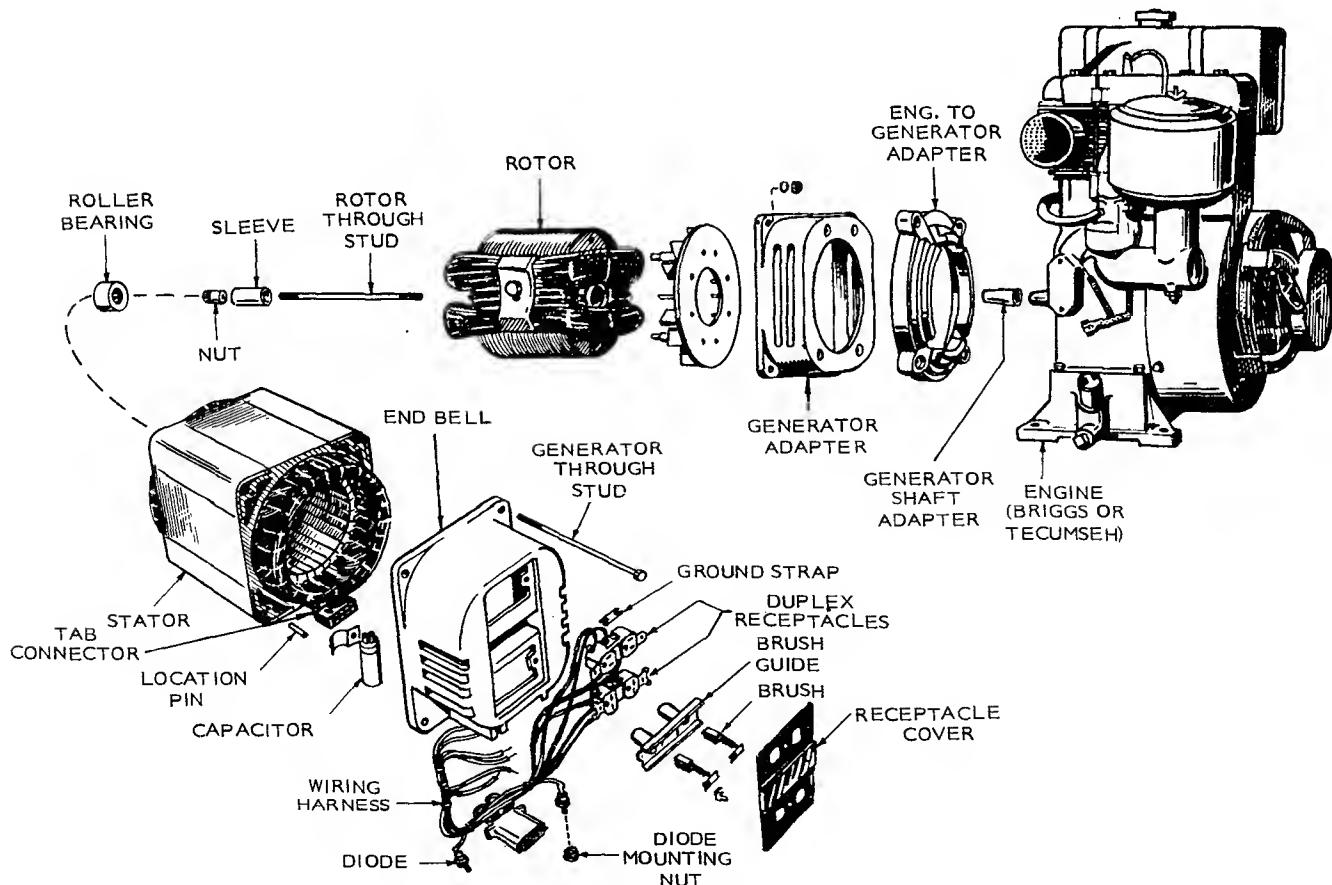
EXPLODED VIEW OF ALTERNATOR
